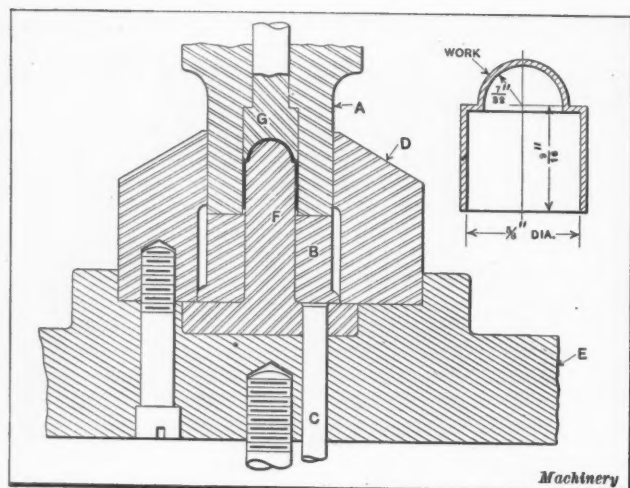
Combination Blanking and Drawing Punch and Die which produce the Work as shown in One Operation
